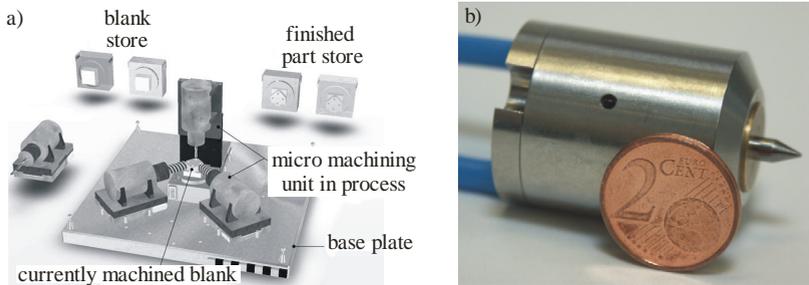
a) Example of a small machine tool - “Square-Foot-Manufacturing” [3],
